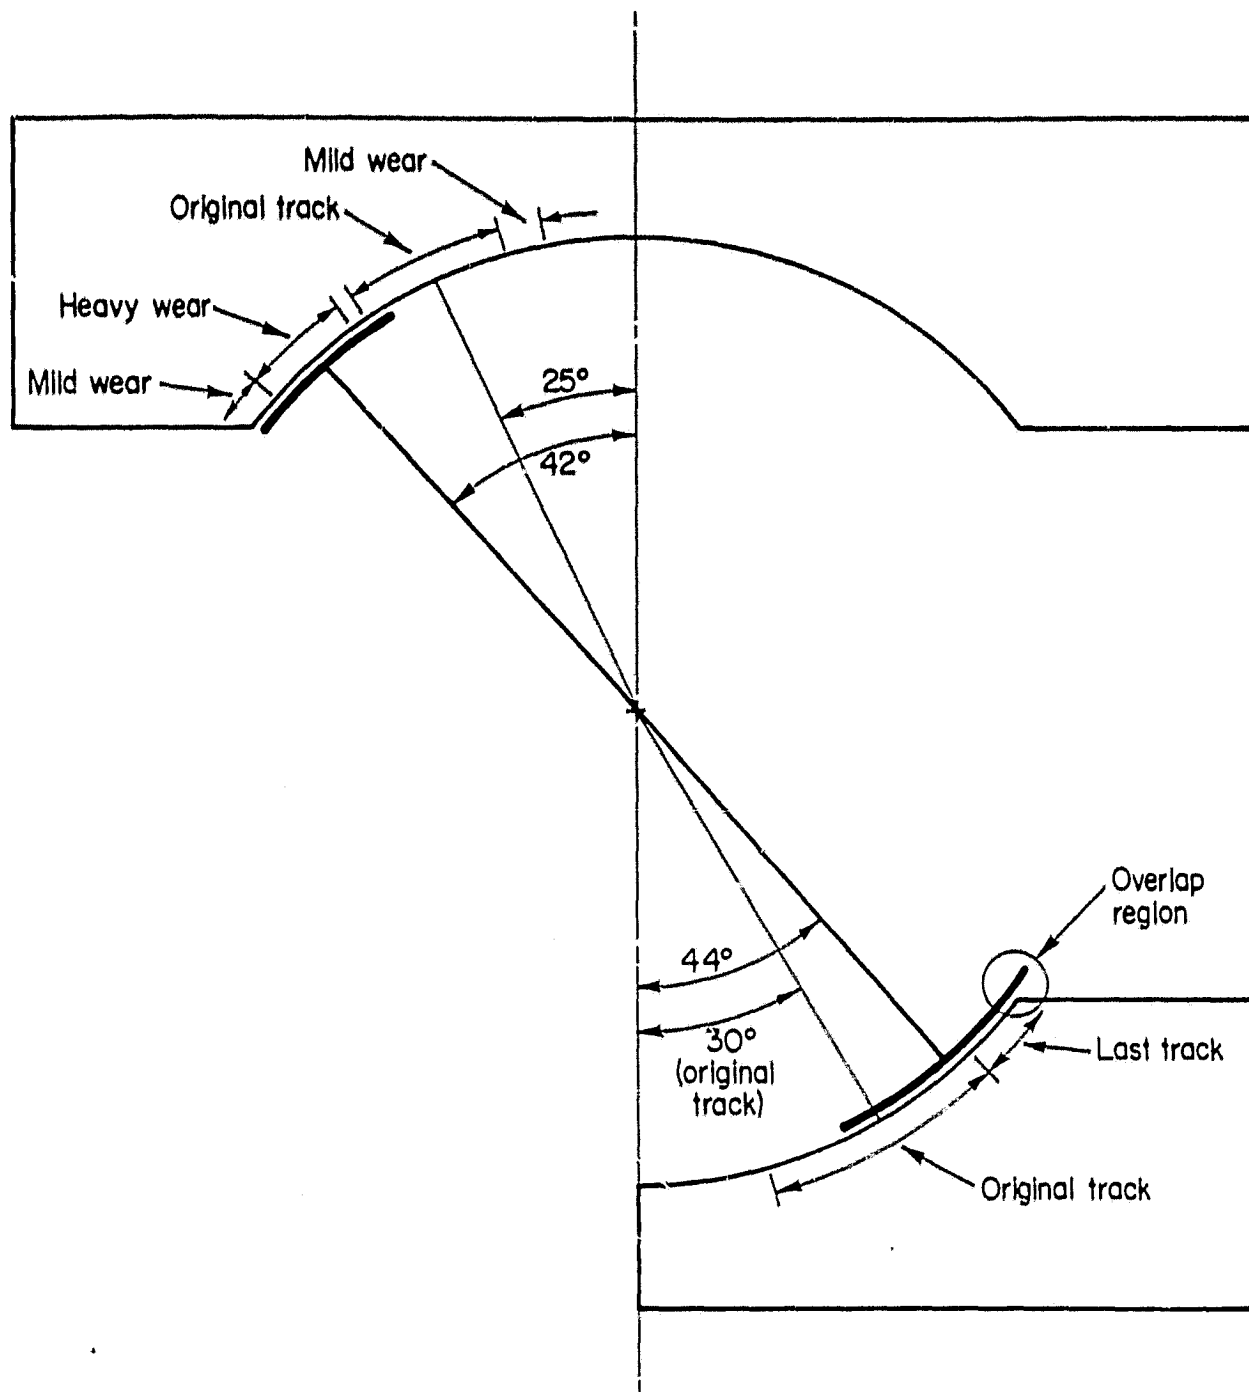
EFFECT OF .4 mm (.016 inch) DIAMETRAL CLEARANCE LOSS AND 6000 POUNDS AXIAL LOAD ON BEARING BALL-RACE CONTACT DIMENSIONS
